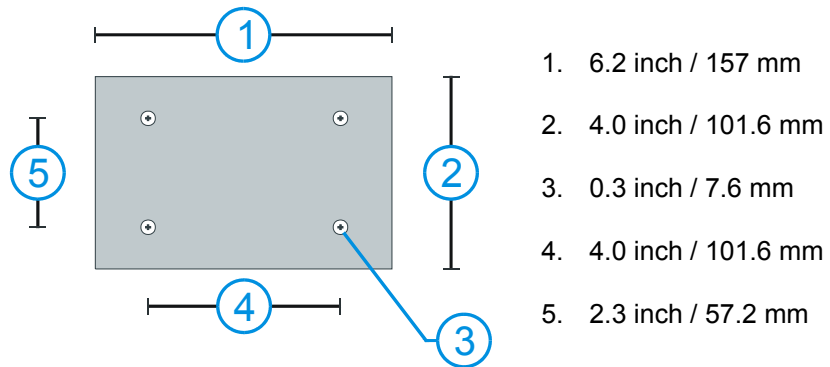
VMT Remote Keyboard - Mounting Dimensions
